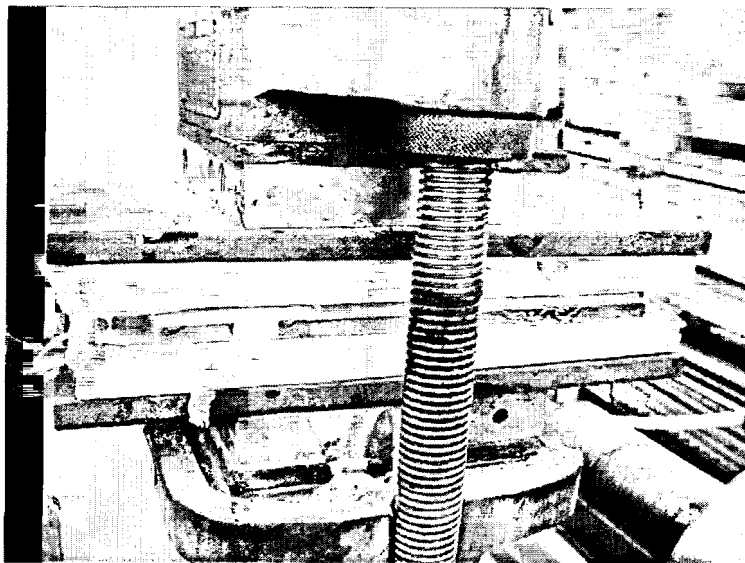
Hydraulic Press Used to Fabricate Specimens
